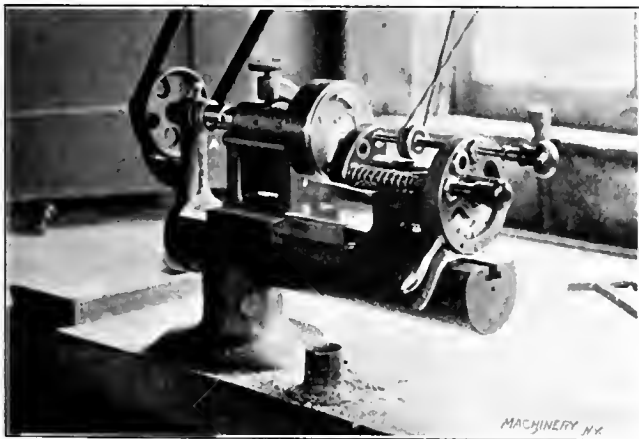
Bench Lathe equipped with Quill used when Boring Center Holes in Watch Plates
